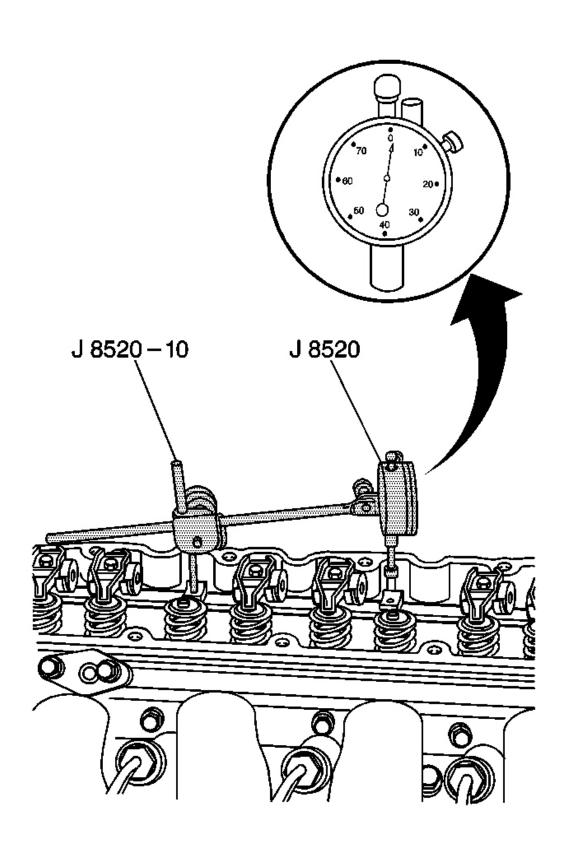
Measuring Camshaft Runout Courtesy of GENERAL MOTORS CORP.
